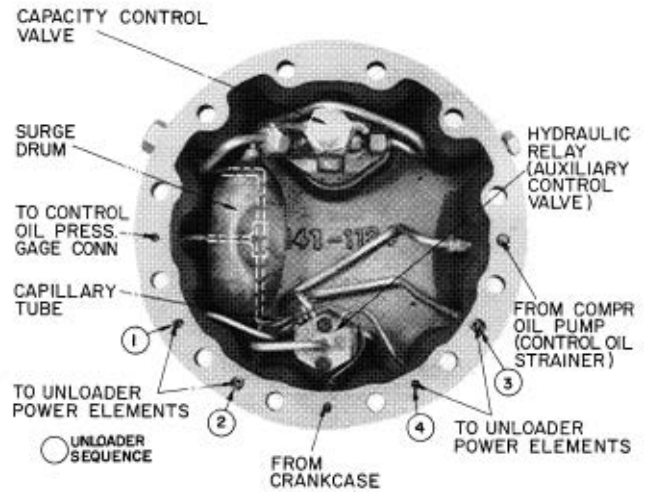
5H Pump-End Cover and Control Assembly (5H40 through 86)
